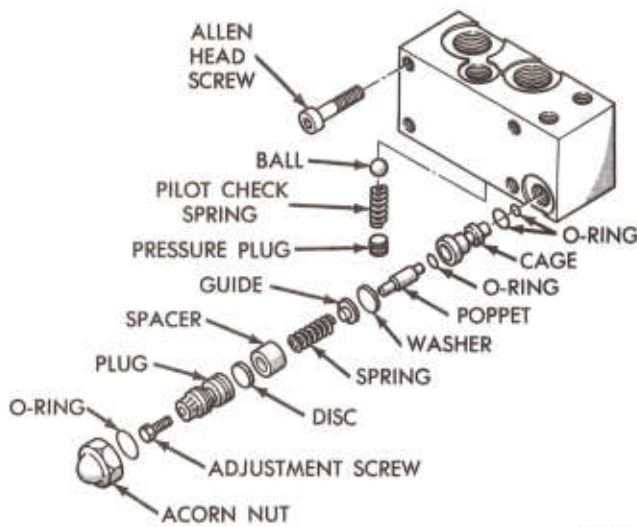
Four-Way Valve ("C" Solenoid) (Exploded View)
